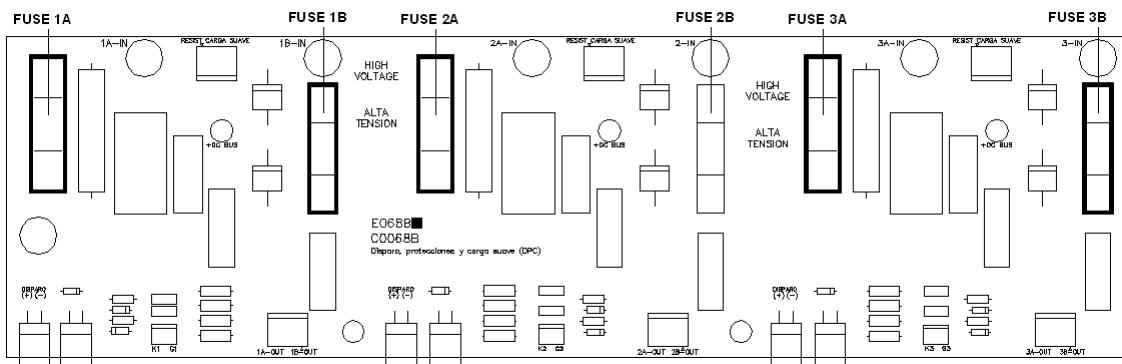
Frame 5,6,7,8 Snubber PCB fuses
